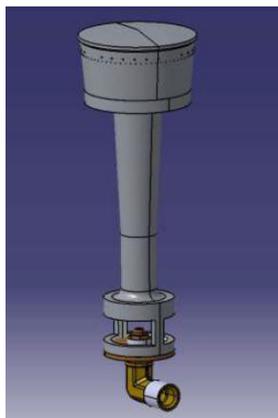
The technical drawing of the burner using hydrogen as fuel in a commercial cooker.
